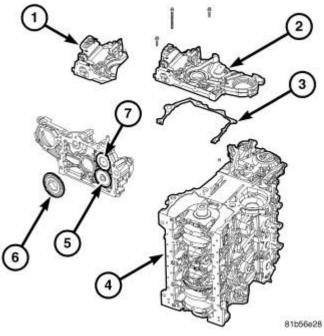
Vacuum Pump And Oil Pump Assembly Courtesy of CHRYSLER LLC
